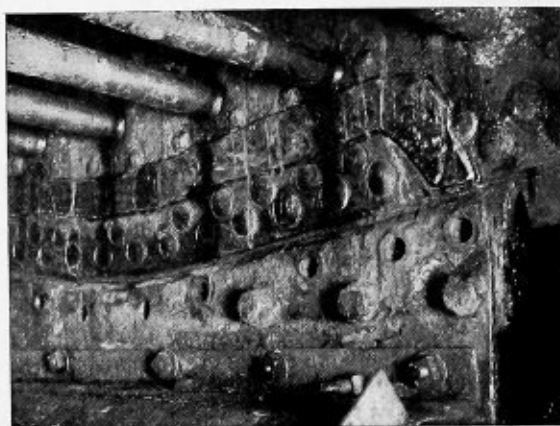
Patch in Locomotive Boiler Welded to Plate
